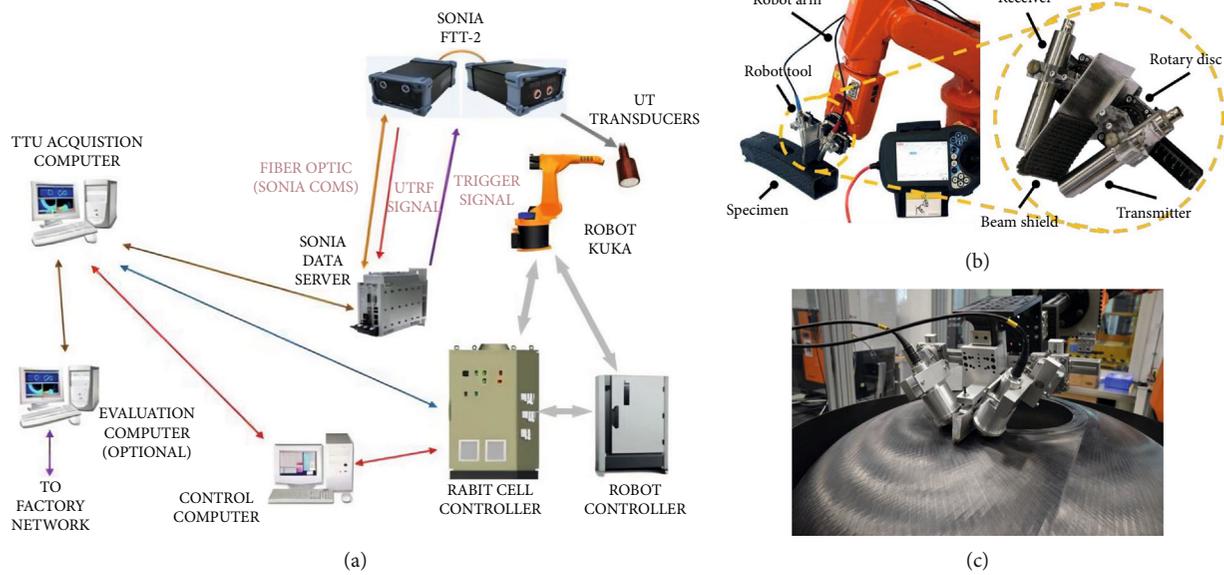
Joint robot combined with ACU C-scan. (a) New ACU C-scan system based on a joint robot [87]. (b) Joint robot to adjust the detection angle, the probe is installed on the rotating disc [88]. (c) A joint robot is being tested on a sample [89].
